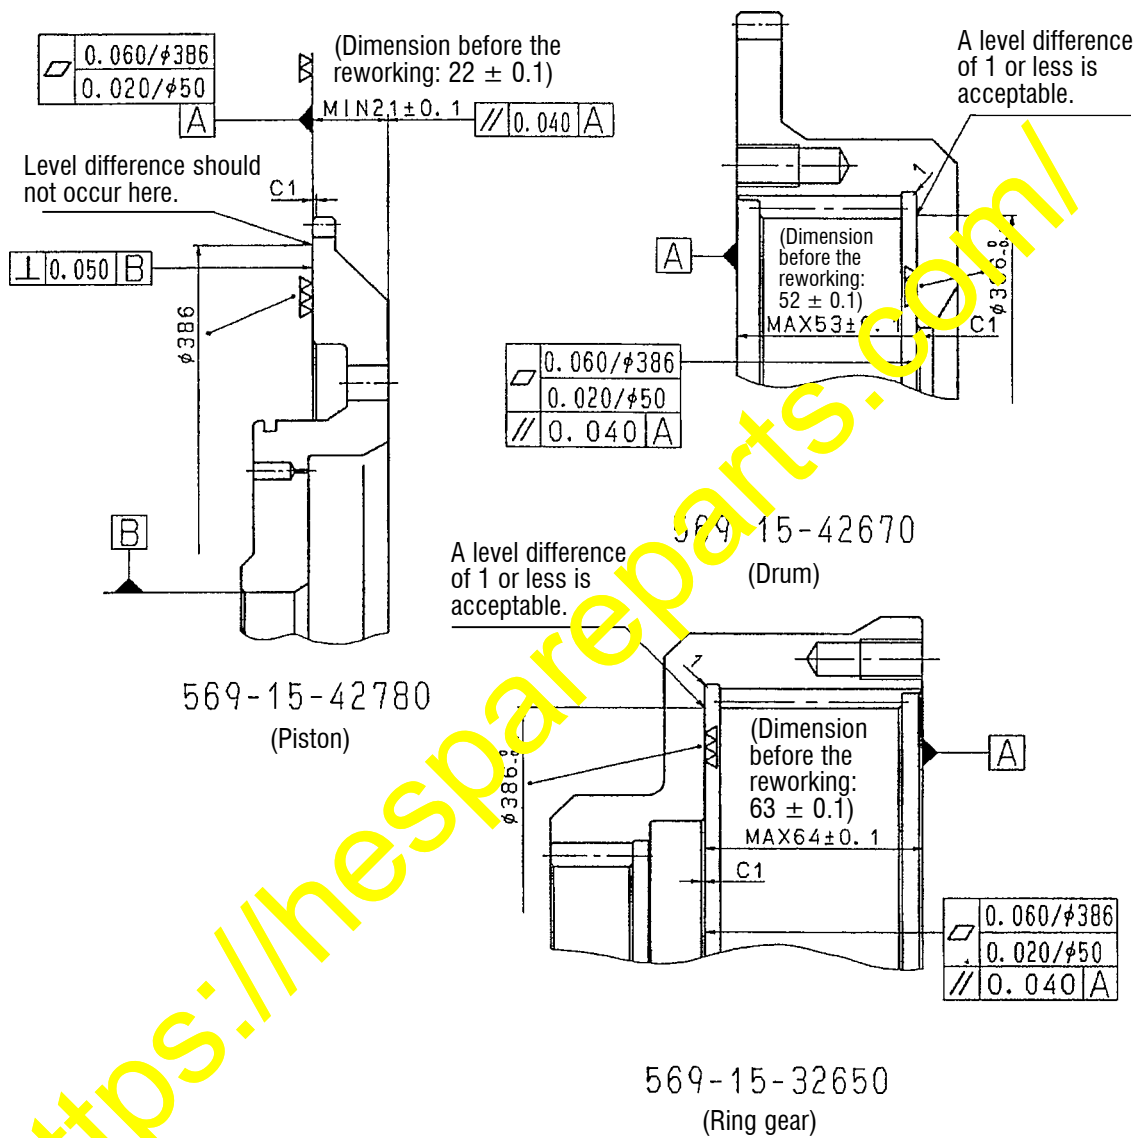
Detailed reworking drawing for the ring gear, piston and drum
